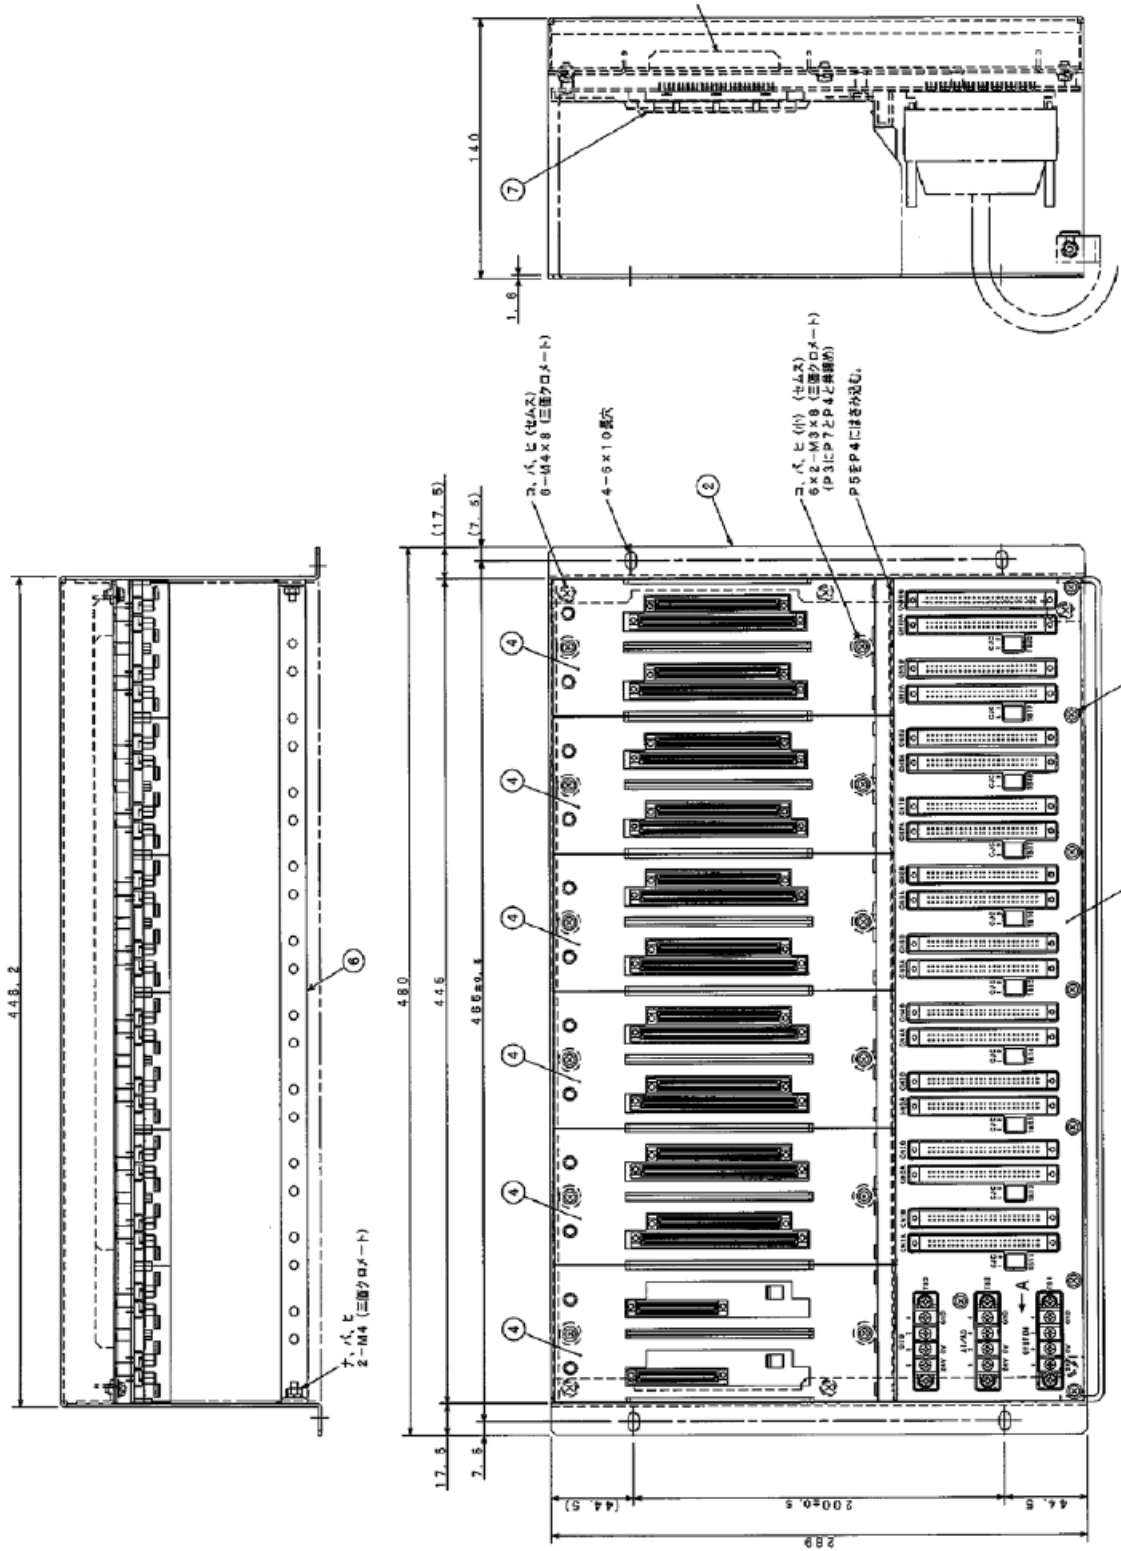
Horizontal I/O Base unit BU927F outside dimensions
